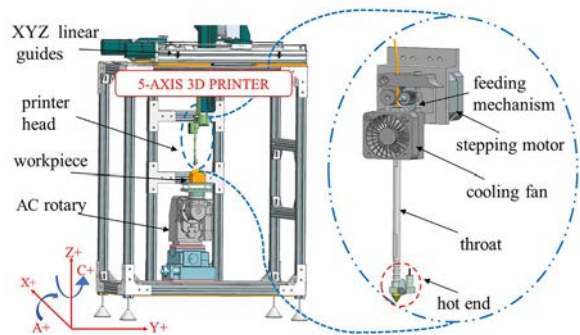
Concept design of our 5-axis FDM 3D printer with the throat-extended extruder
